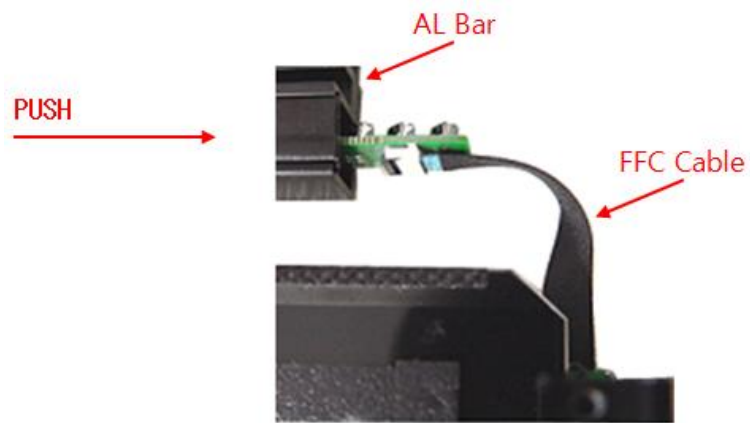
Disconnect FFC Cable, and push Touch PCB to one side
